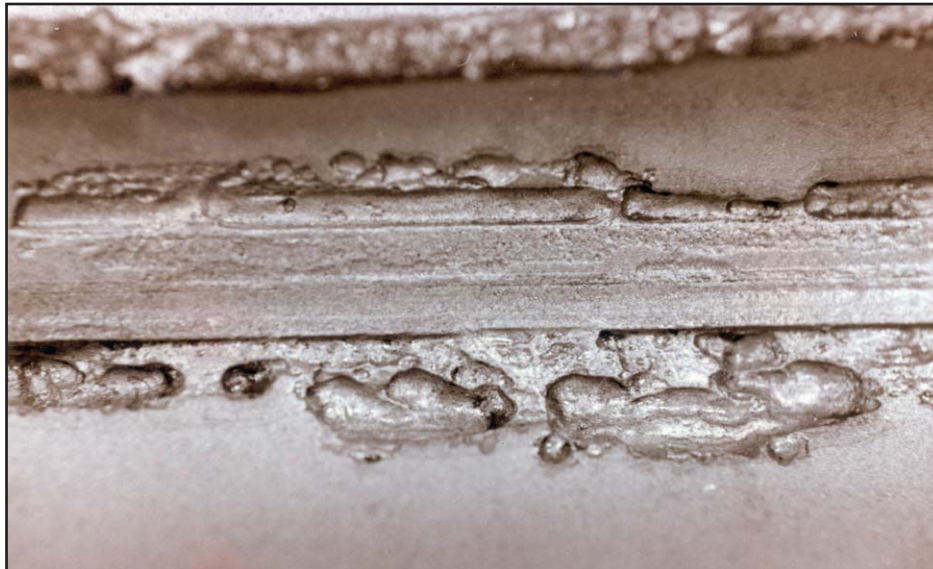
HAZ as Typified by Deep Corrosion Along Weld Seam
